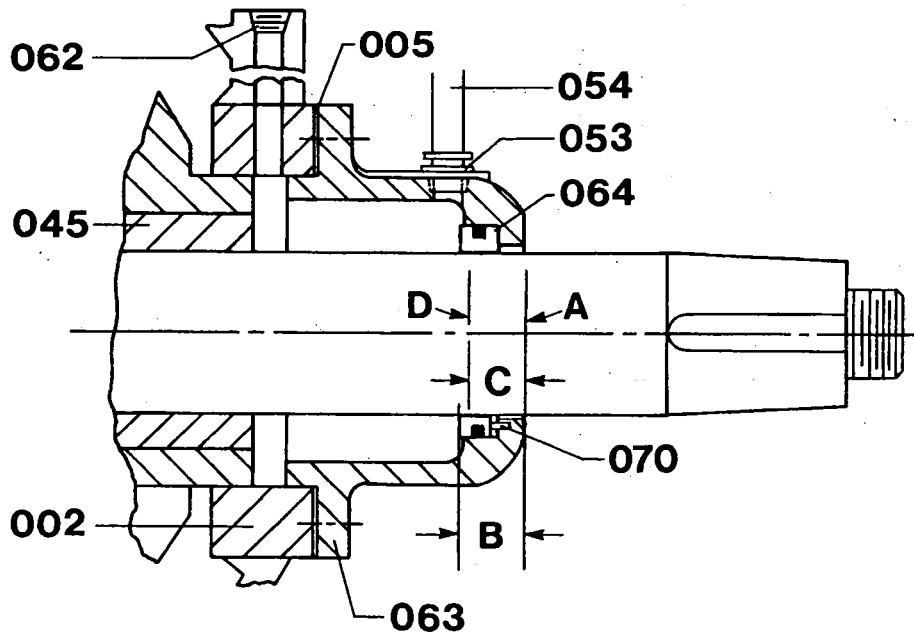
Position Setting of Seal Rotating Assembly (Seal 676)
